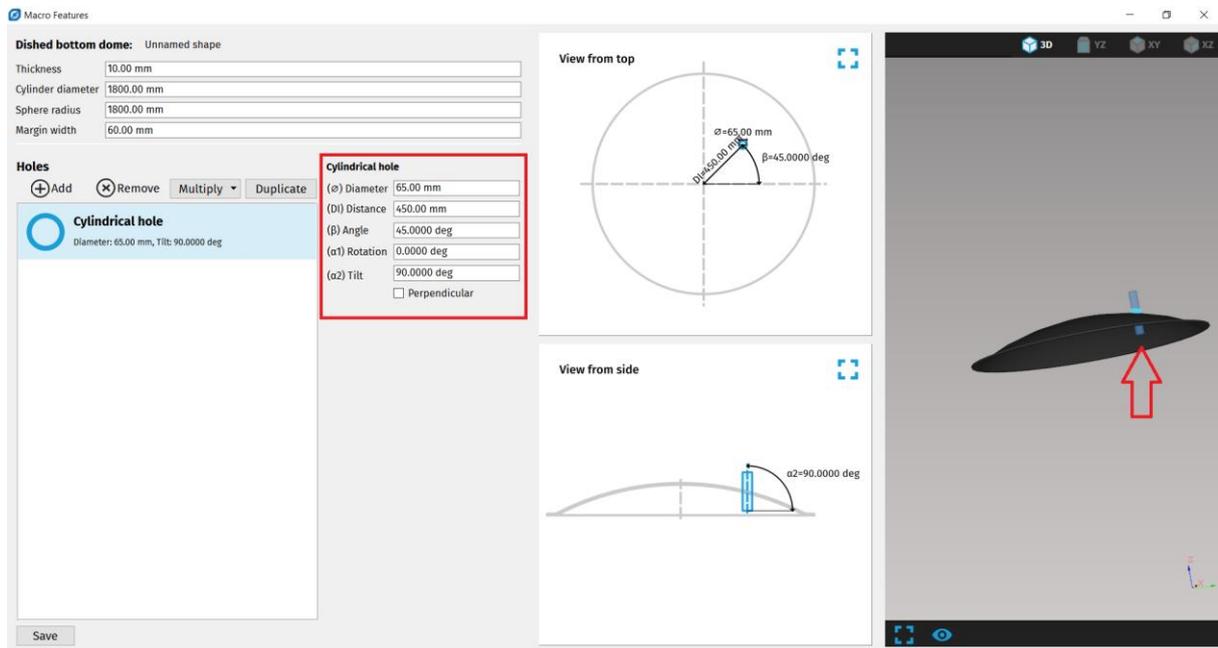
Example of Cylindrical hole macro on Dished bottom dome
